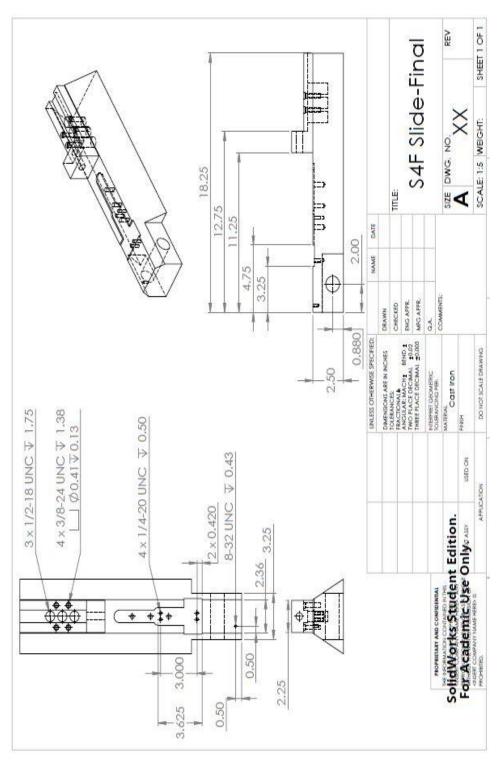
Dimensioned CAD drawing of the final modified S4F slide with Wintriss bolt-on strain link and wire strain relief mounts.
